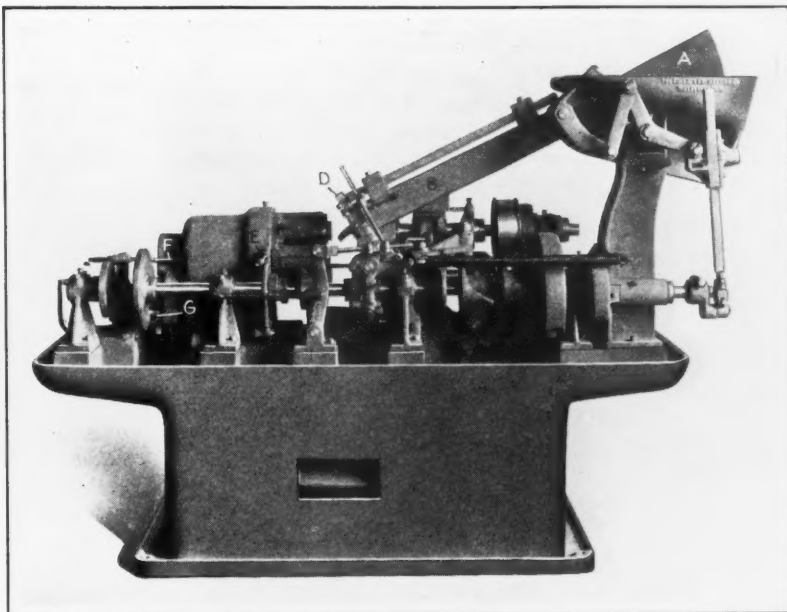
Opposite View of the Bolt Pointing and Threading Machine
